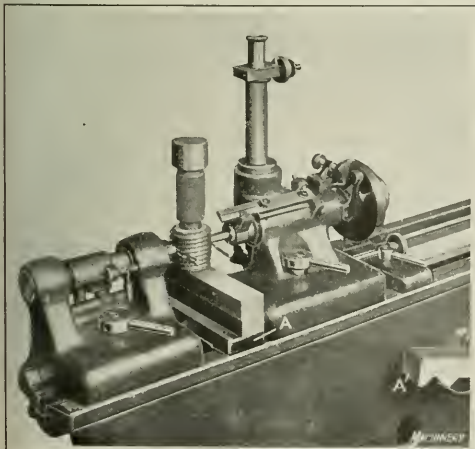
Method of mounting Small Thread Plug Gage for measuring by the Three-wire System
